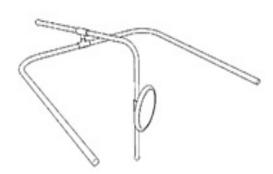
Dental Assembly including the stable dental mirror and the rubber dam frame.
